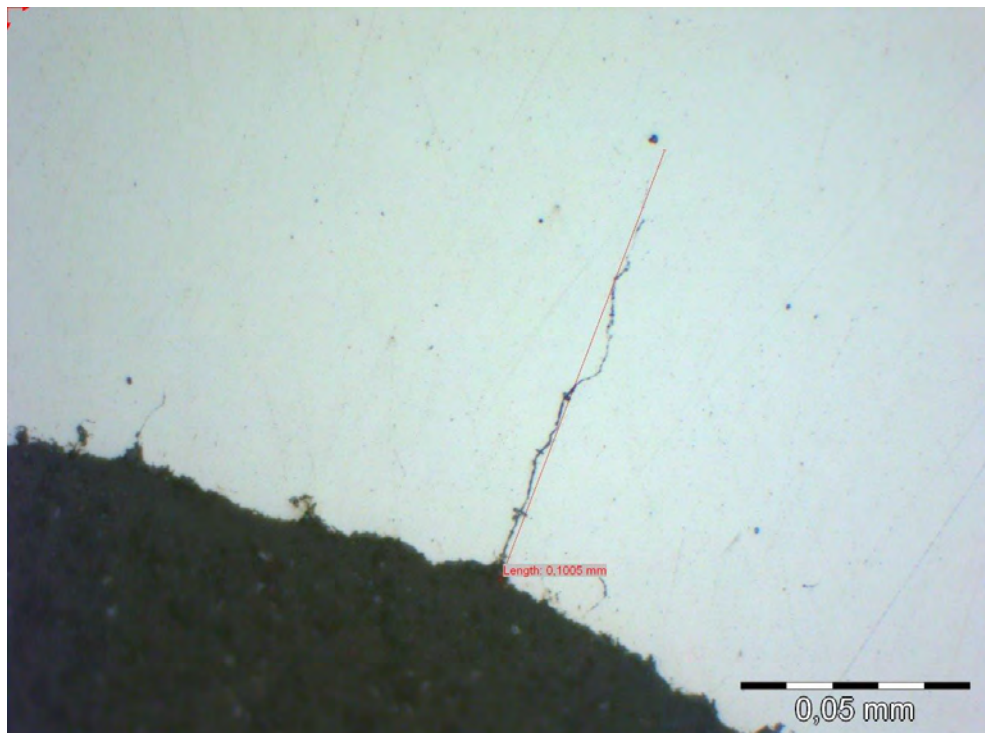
Cut one in crack at segment A, third ridge on barrel no. SFK 0120-A
